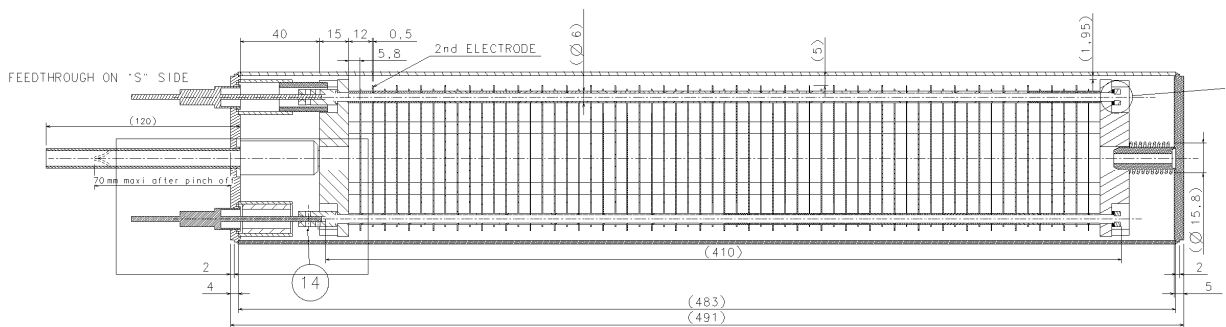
BLM design. Part of the drawing no. LHCBLM__0001[2].
